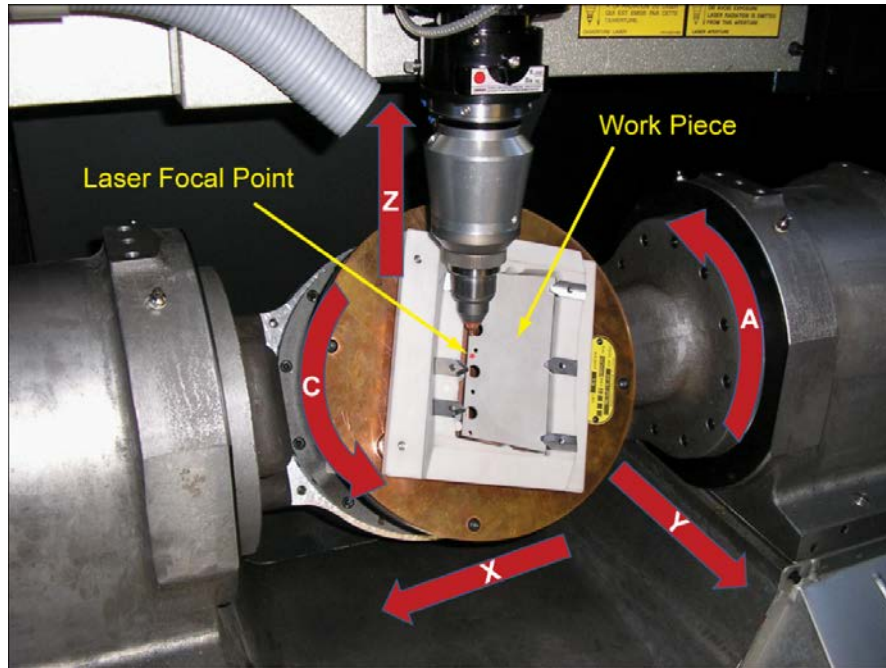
Configuration of 5-Axis Laser Drilling Machine Tool.
